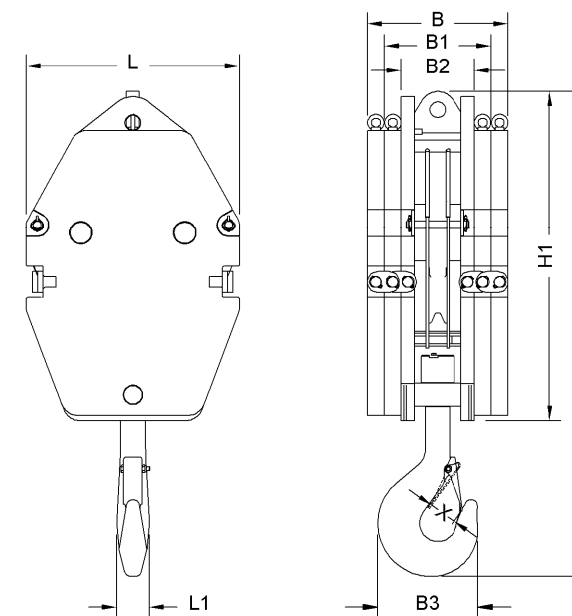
Pulley block dimensions (50 t (110,230 lb))
